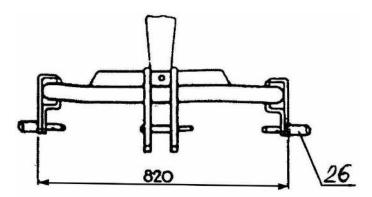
Spacing of pins of lower attachments of three-point frame, category II 26 – lower attachments
